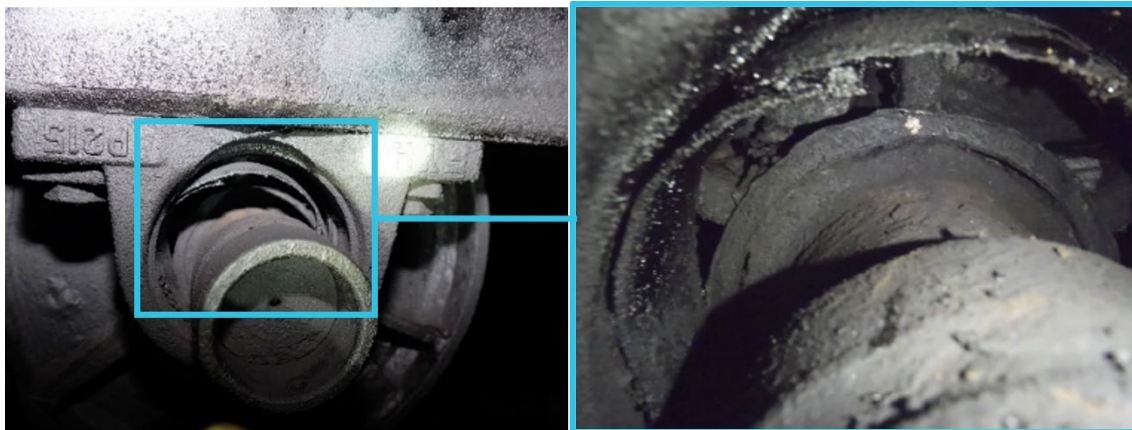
Failed starboard outboard bearing of lower snub impact idler and intact bearing on port side (for comparison)
